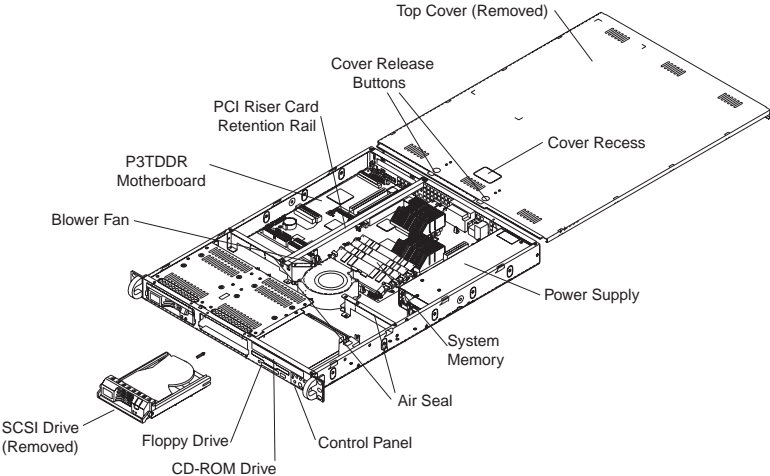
Accessing the Inside of the SuperServer 6011D (with one SCSI Drive removed)
